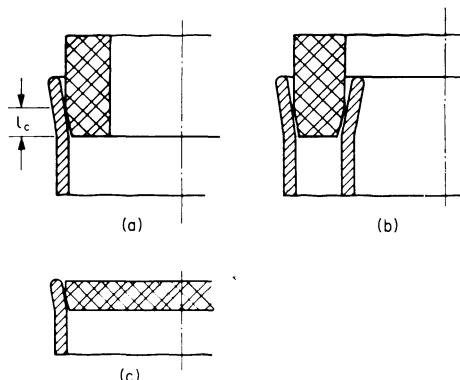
Compression seals; (a) inside seal; (b) inside–outside seal; (c) window seal. After Zollman¹³⁵⁷ and Levin⁷⁶¹ (*Courtesy of Pergamon Press*)
